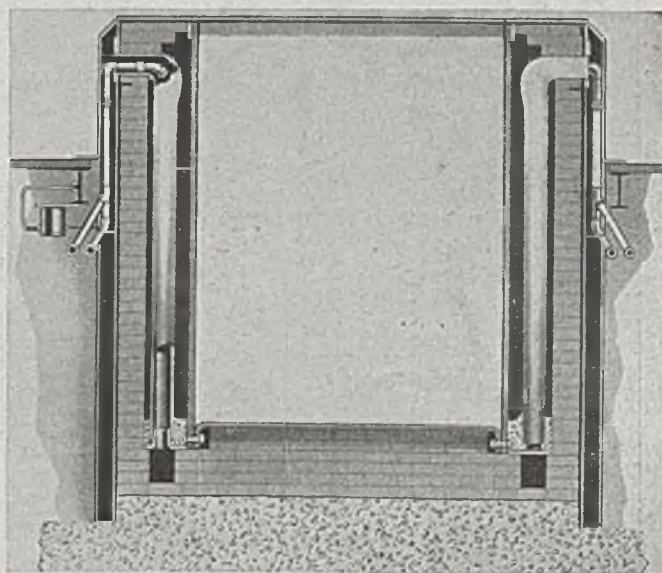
(right)—Cross sectional view of vertical tube type galvanizing furnace
